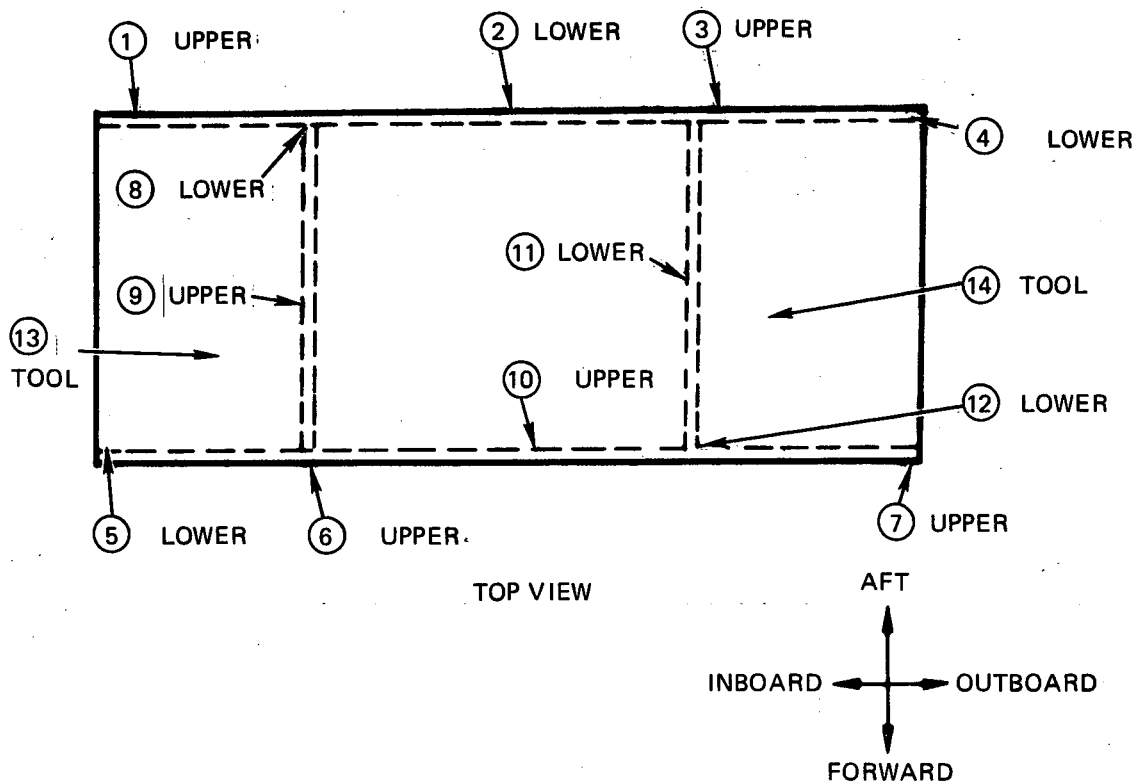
Thermocouple Locations, Final Assembly Bonding
